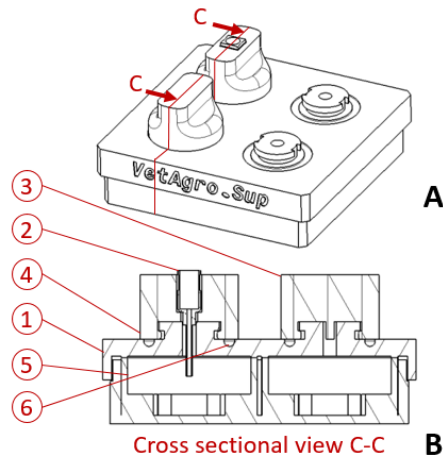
Schematic of the 3D printed bioreactor. A. General overview. B. Cross-sectional view C-C: (1) upper part, (2) nozzle, (3) sterile cap, (4) nozzle tip, (5) lower part, (6) O-ring.
